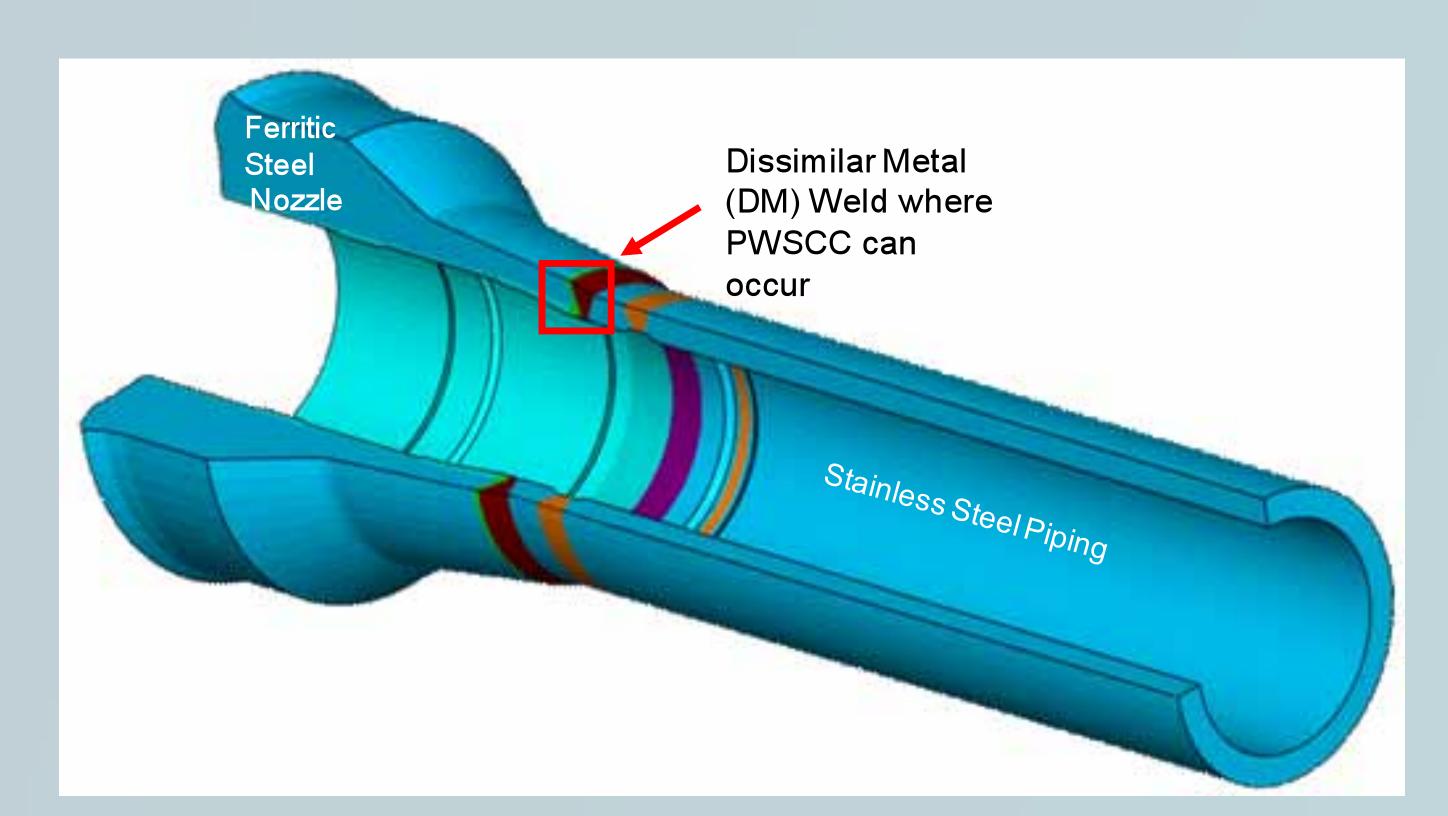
Cutaway view of a carbon steel nozzle DM weld and stainless steel piping typical in a light-water cooled nuclear power plant
